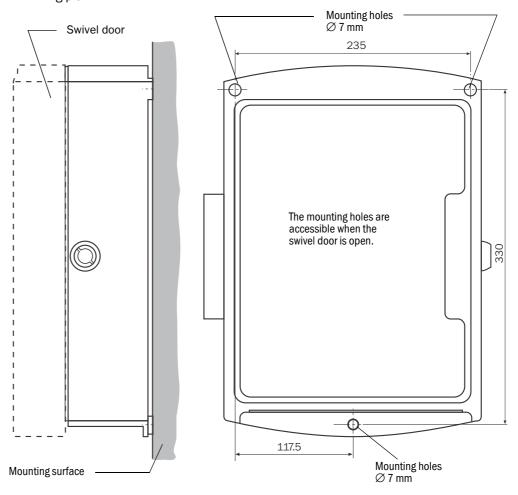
Mounting holes layout (Drilling plan) to fit the EvU (cast enclosure)
